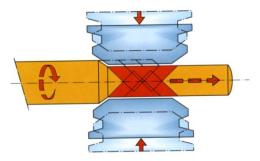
Depth to which the plastic strain affects the material during forging on radial forging machines
